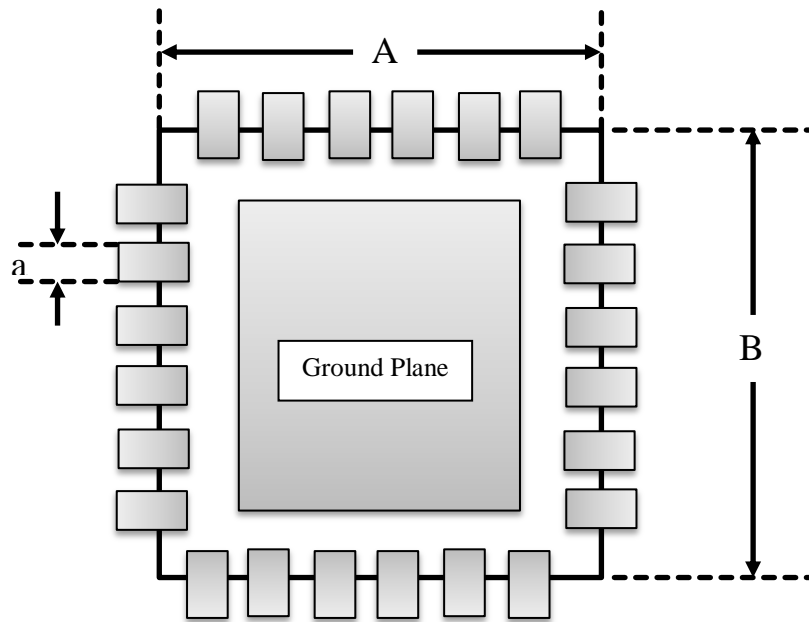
PCB Layout Diagram for a QFN 24 pin 4x4mm package.
